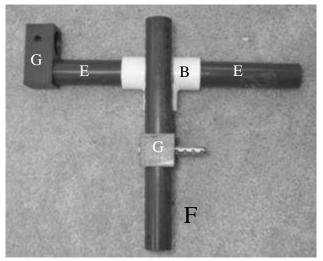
Assembly of the Small Wheelchair (Step 7).
